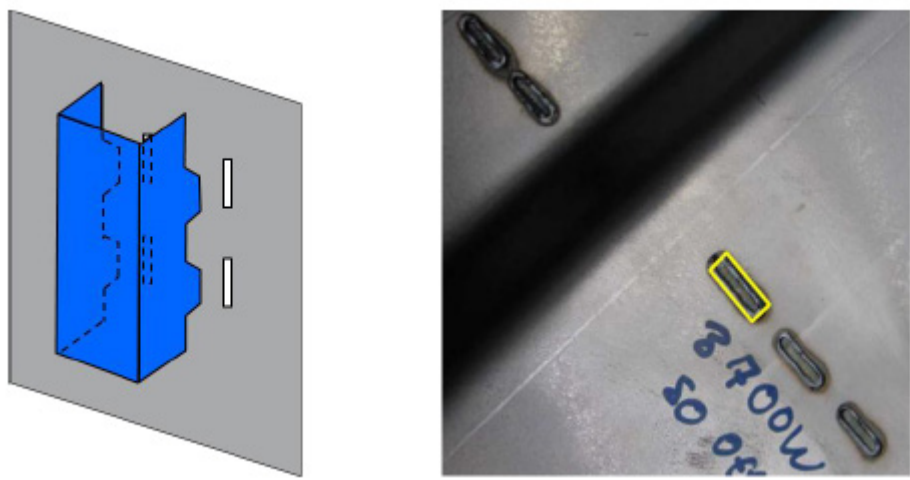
Laser beam welding without flanges: schematic (left) and example of use (right) ²⁴⁸
